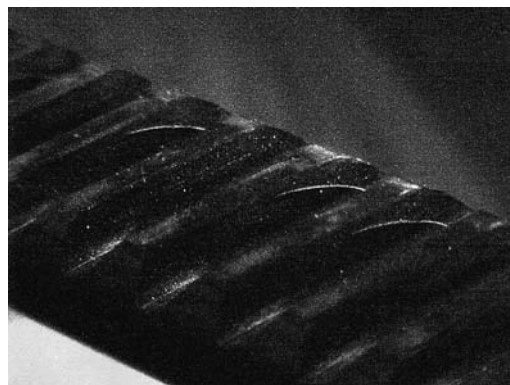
Magnetic particle inspection of the failed pinion gear showed arc-shaped cracks on the gear tooth faces.
